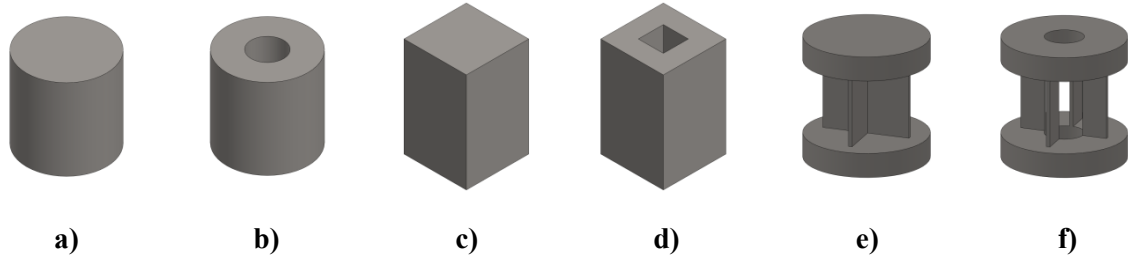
Different structure for torque sensor: a) Solid circular shaft; b) Hollow circular shaft; c) Solid square shaft; d) Hollow square shaft; e) Solid cruciform; f) Hollow cruciform
